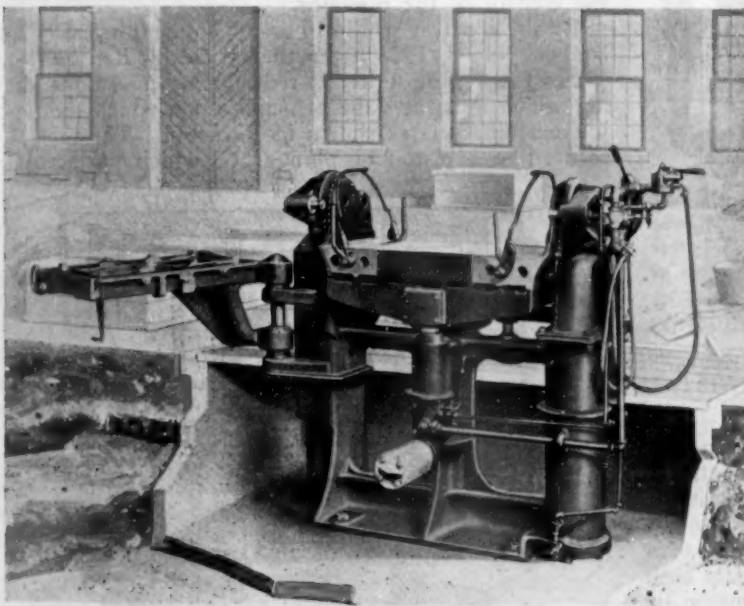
OSBORN ROLL-OVER JOLT MACHINE
